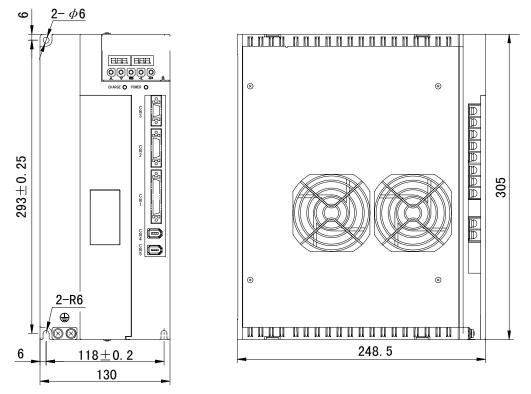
GS3075, GS4075 Series installation dimension (Unit: mm)
